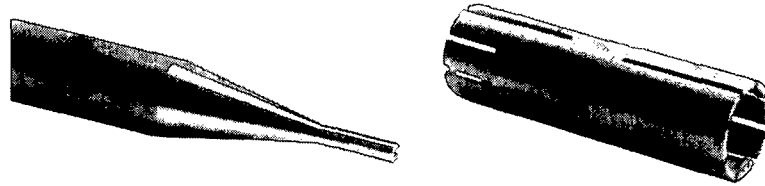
Photograph of the prototype’s inner conductor (left) and the slider (right)
